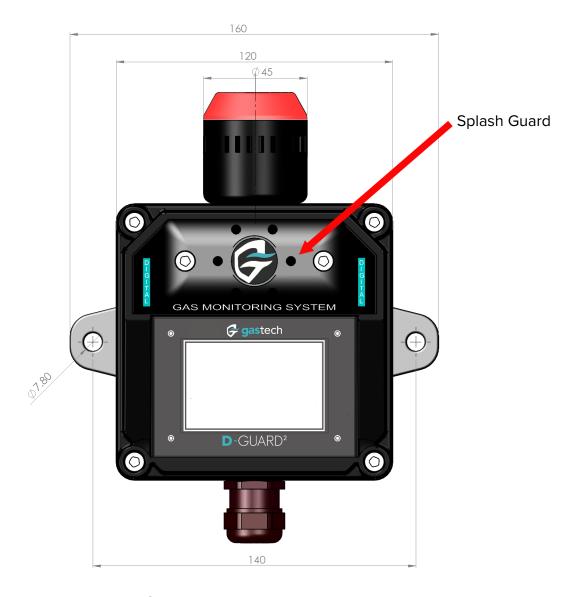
D-Guard<sup>2</sup>S mounting dimensions in millimetres.
